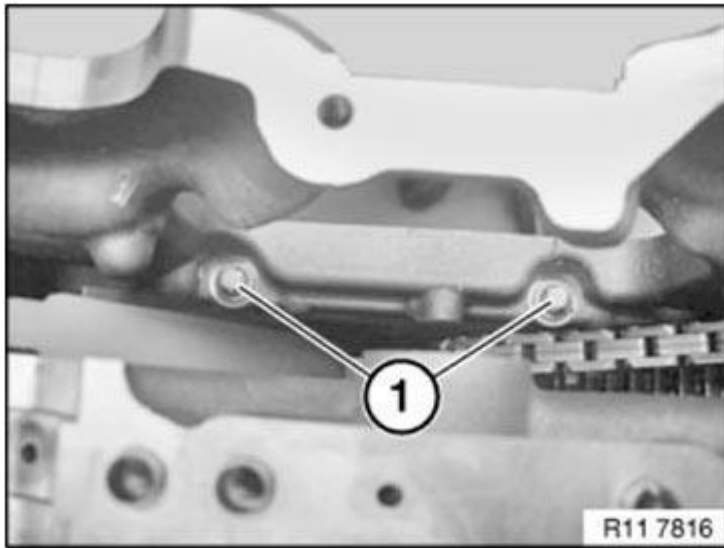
Identifying Bolts Between Cylinder Head And Timing Case Cover
